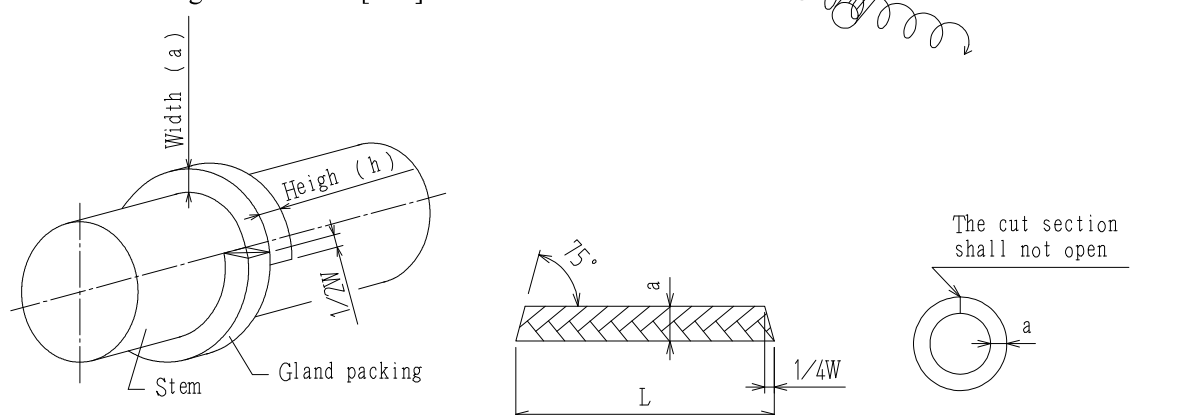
Cutting the gland packing & revise dimensions of gland packing
